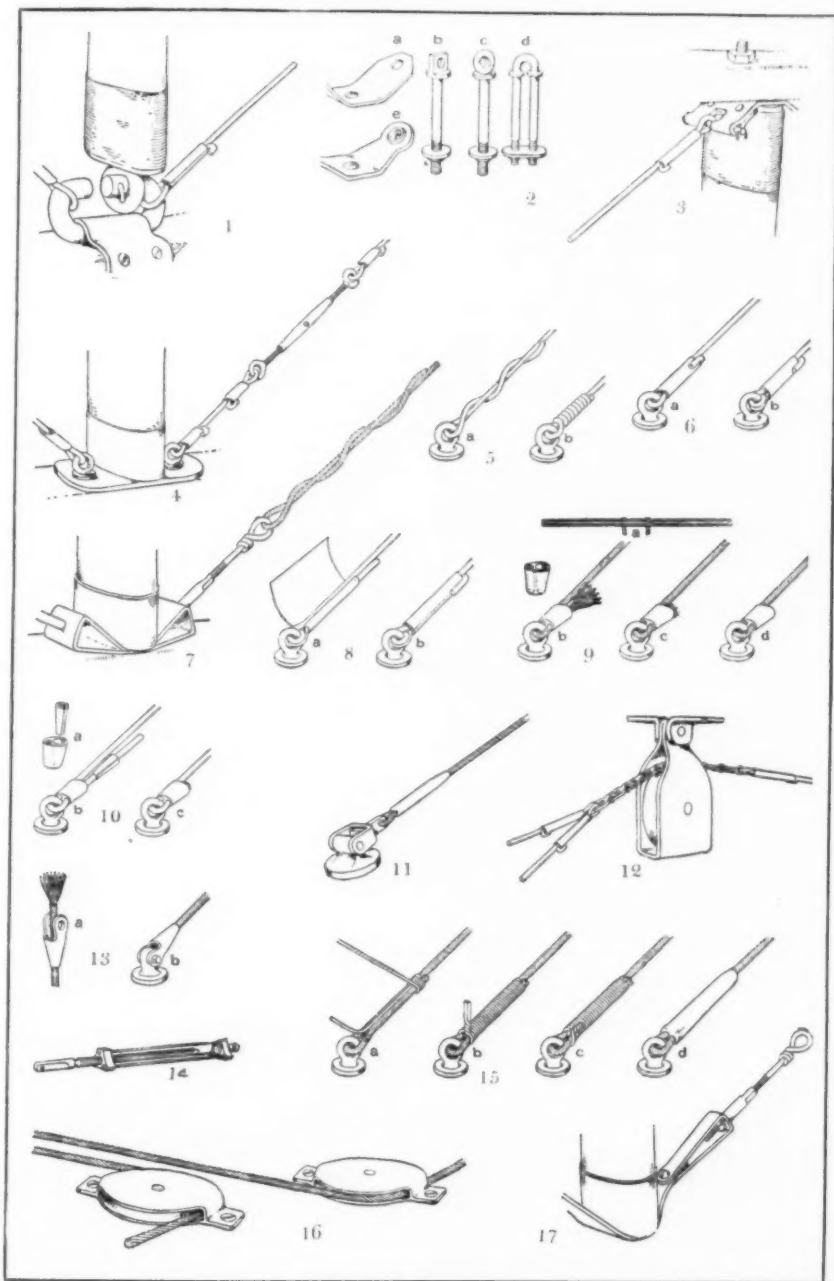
Attaching and detaching struts and stays on Wright Biplane. Fig. 2.—Sharp and smooth edged eyes. Fig. 3.—Strap fastening for stays. Fig. 4.—Lower end of upright spruce strut. Fig. 5.—Securing wire ends. Fig. 6.—Simple and strong device for fastening stay. Fig. 7.—Simple turnbuckle on Curtiss Biplane. Fig. 8.—Fastening used last season. Fig. 9.—Securing wire stay strand or rudder and alleron cord. Fig. 10.—New sleeve socket fastening. Fig. 11.—Wing warping strand secured by swivel. Fig. 12.—Safety chain. Fig. 13.—Well-known wire rope open socket. Fig. 14.—Strong Aeroplane turnbuckle. Fig. 15.—Method of making strong and nest stay strand fastening. Fig. 16.—Alleron or rudder cord on small pulleys. Fig. 17.—Bicycle spoke turnbuckle.
